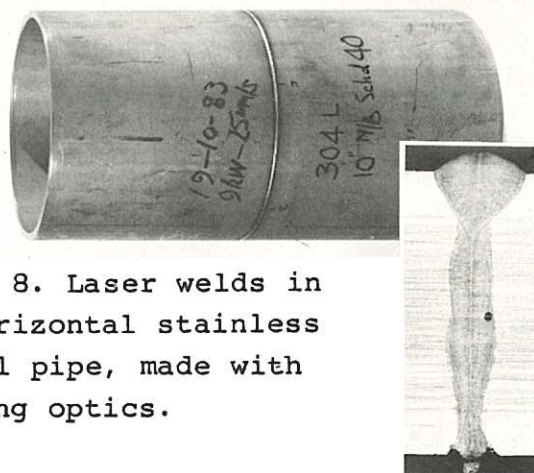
Laser welds in a horizontal stainless steel pipe, made with moving optics.
